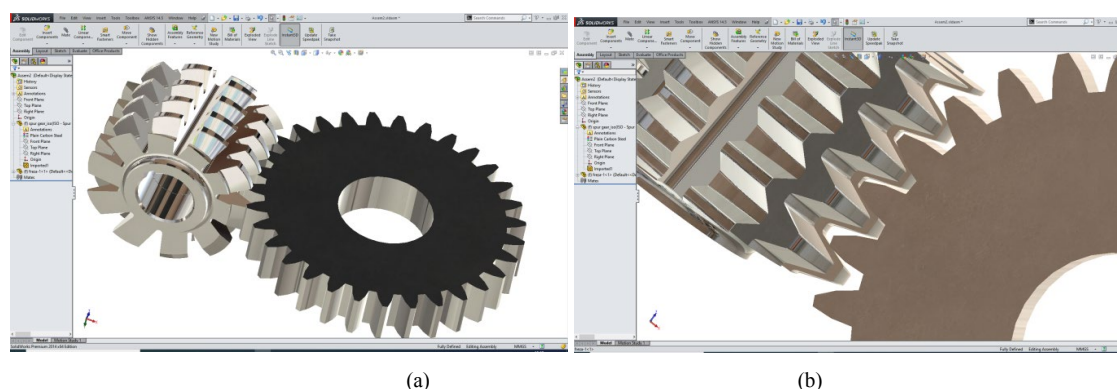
(a) Geometric model of the final assembly, and (b) detail of the spur gear tooth flanks contact
